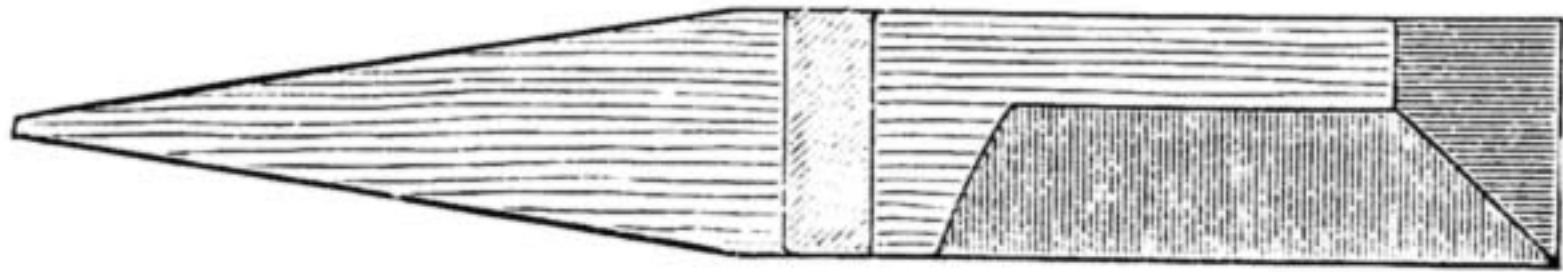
Plan of Underside of Side-Cutting Wood-Turning Tool. (Full size.)
